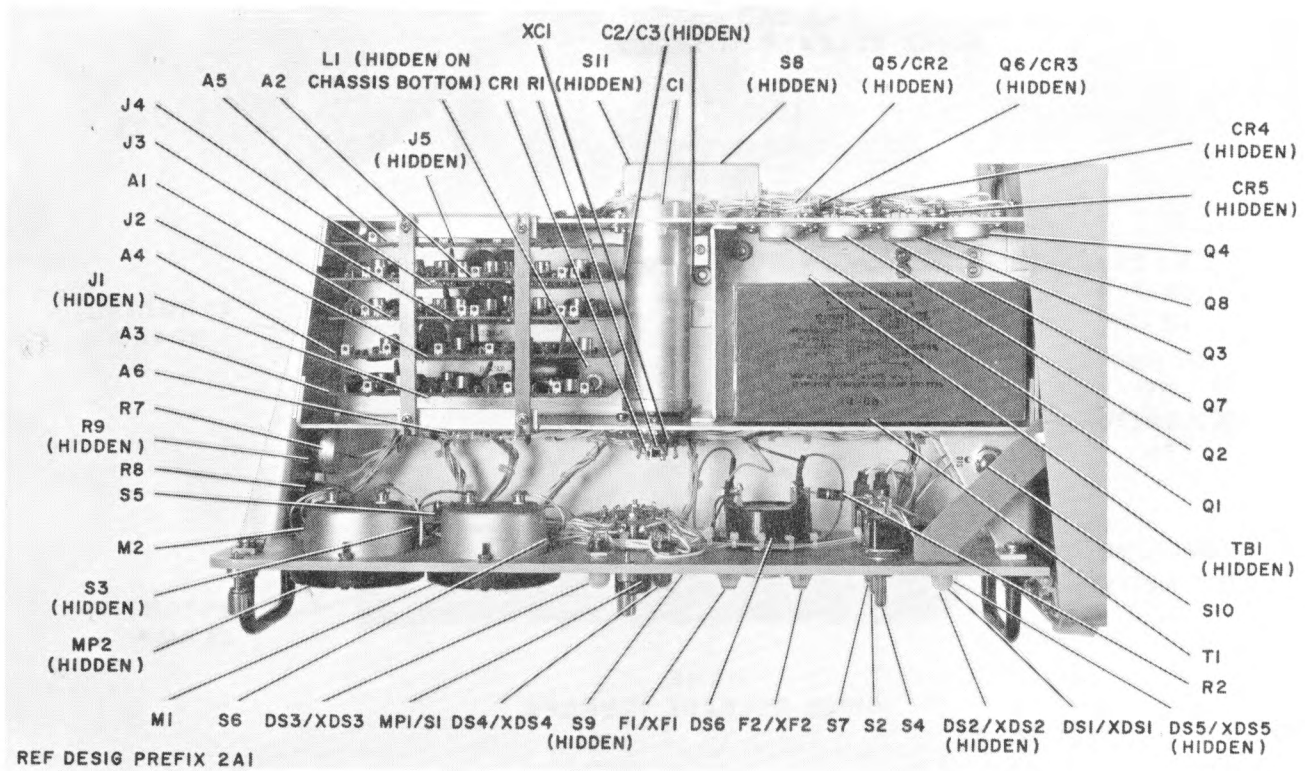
RF-601A/C Antenna Coupler Control Chassis Panel Assembly, Component Locations
